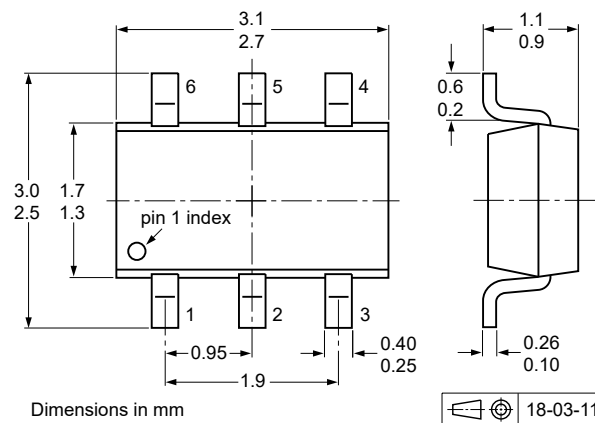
Package outline SC-74; TSOP6 (SOT457)
